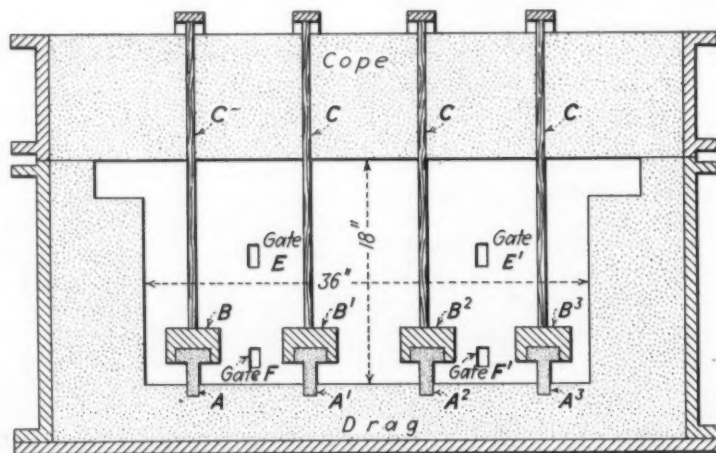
The use of cast iron shrouds in casting this face plate prevented the slot cores A, A¹, A² and A³ from burning out before the iron in the mold solidified.
